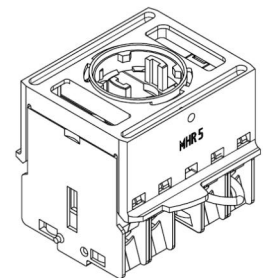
Assembly of MTZU_564 + MTZU_564 to the module holder MHR_5
